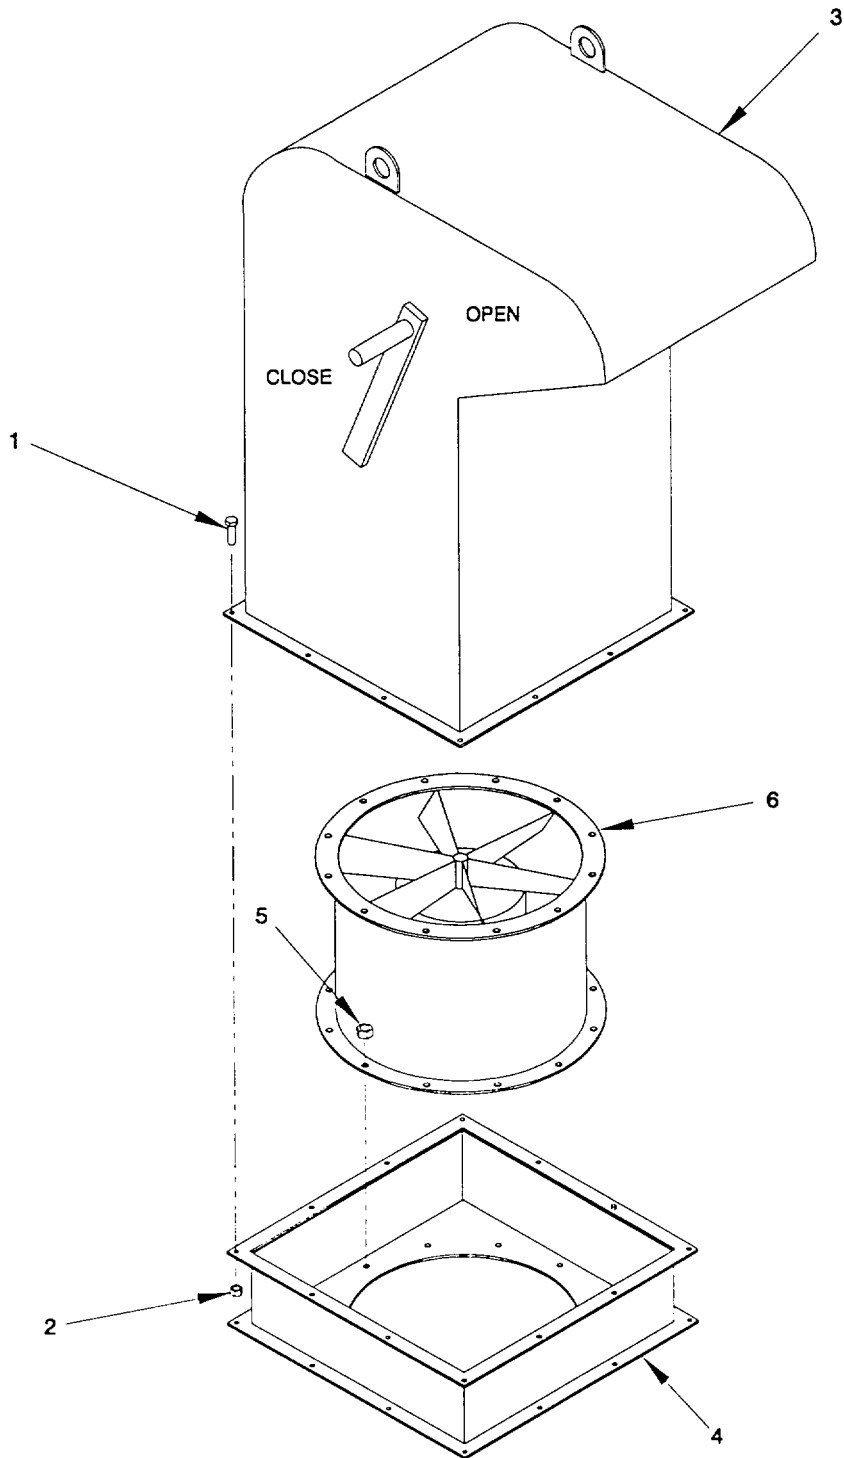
Ventilation Fan. Exhaust Plenum. Remove/Install.
